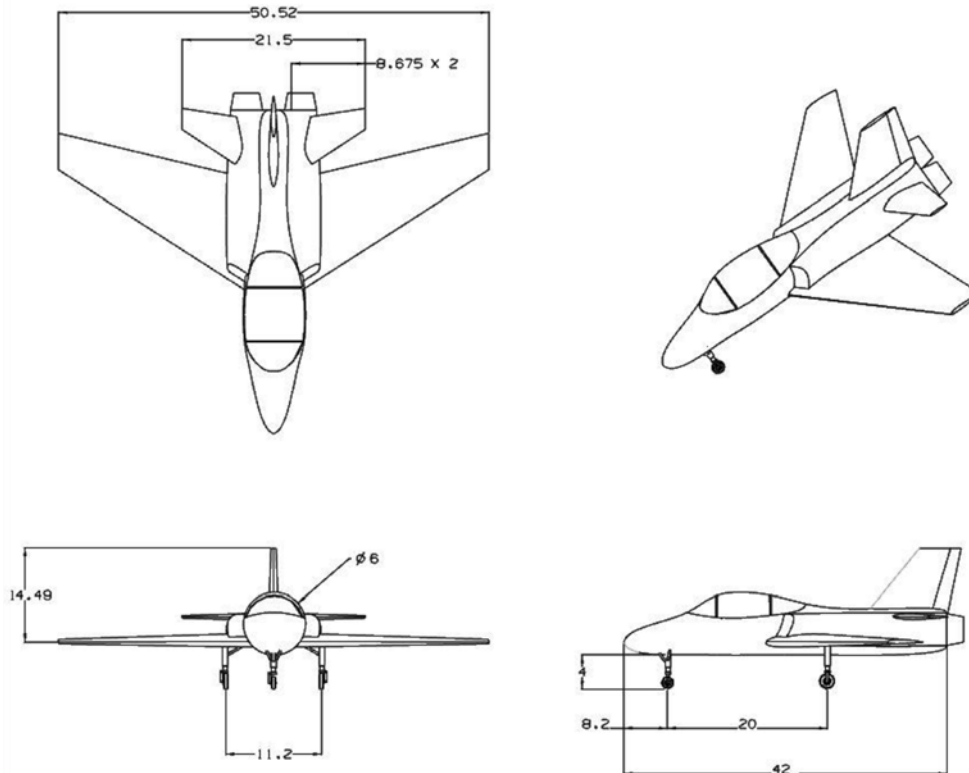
Detailed Dimensions of “FlighterJet” – reference model
